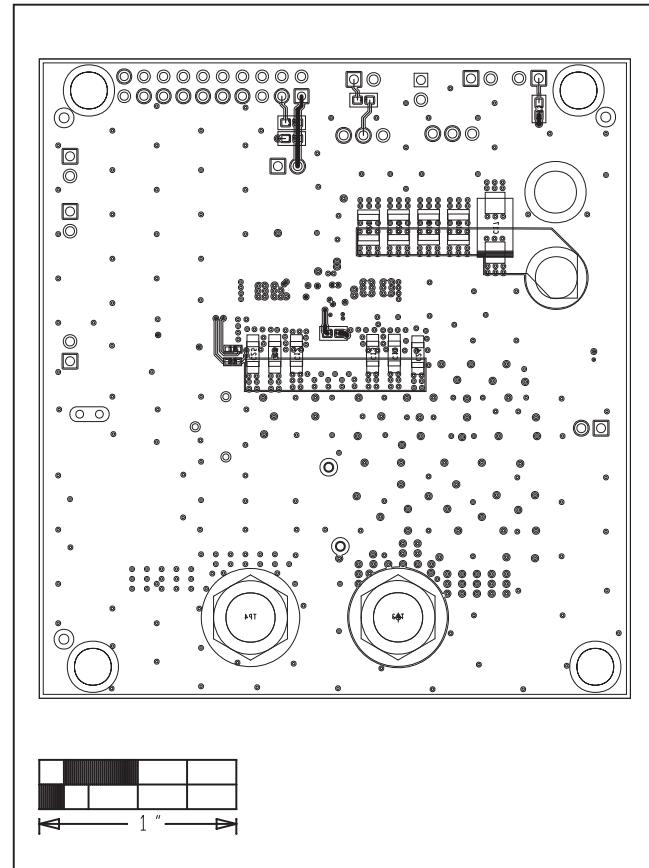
MAX20499C EV Kit PCB Layout—Bottom Layer
